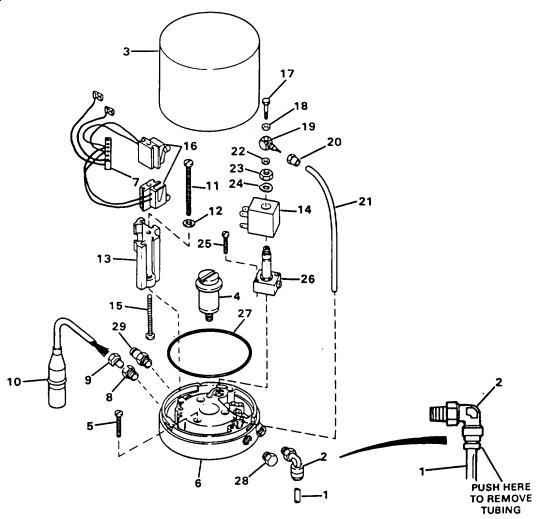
Valve Actuator Upper Section (MODEL WTA-060 ONLY)
